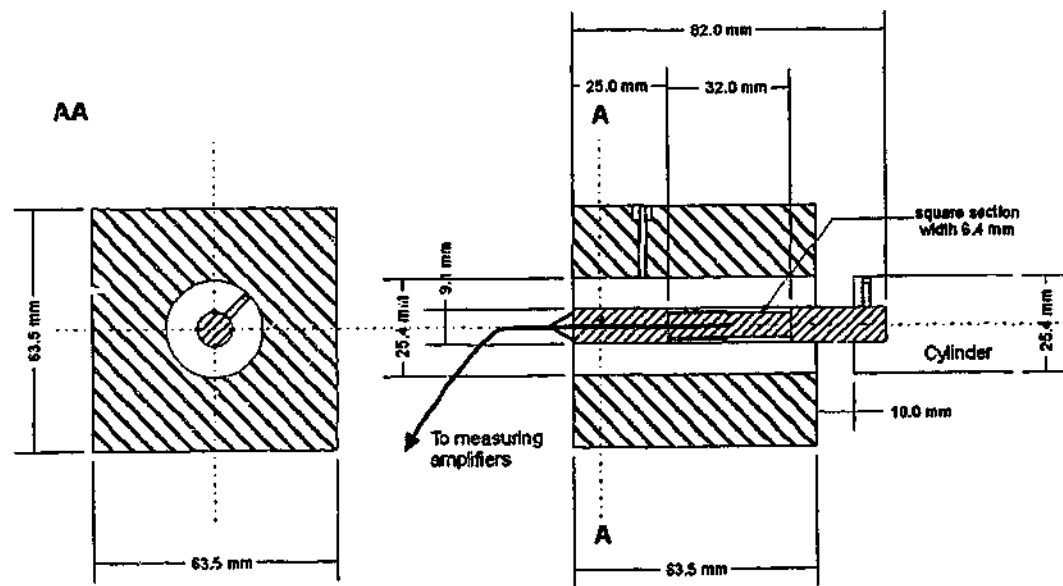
Drawing of the strain gauge sting, the sting holder and the attachment of the sting to the cylinder.
